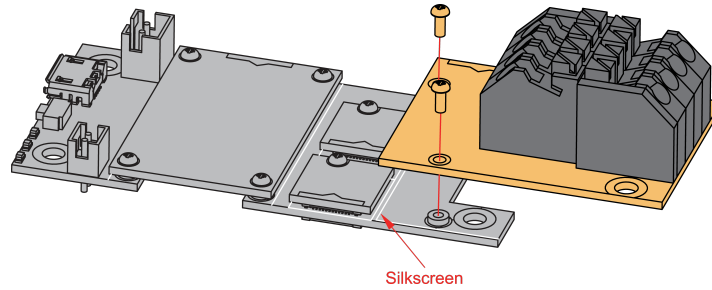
RAK5811 mounting mechanism on a WisBlock Base module
